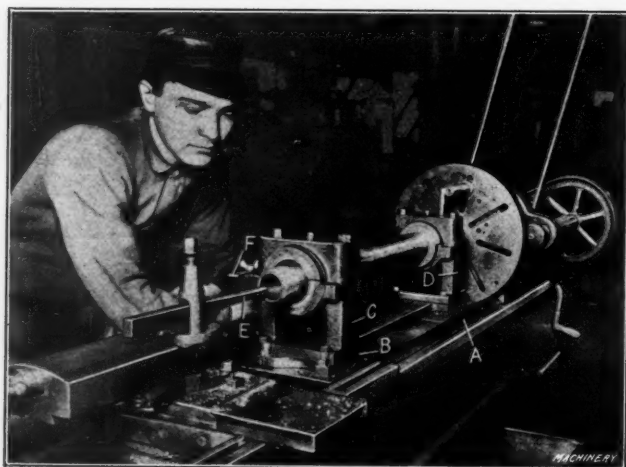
Boring the Taper Hole in the Nose of the Lathe Spindle
